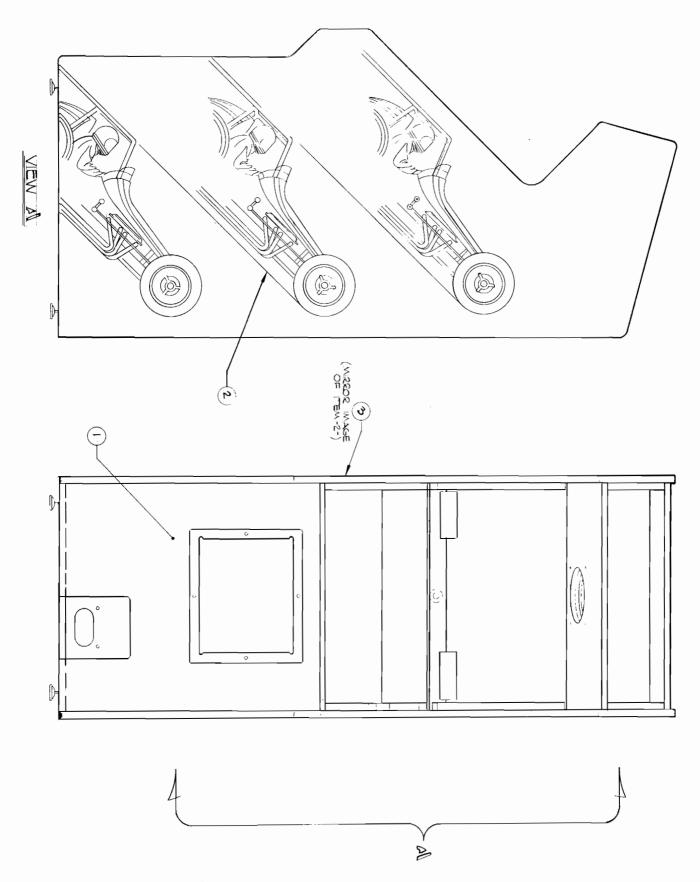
Cabinet Assembly (Graphics) A032840-01 D
